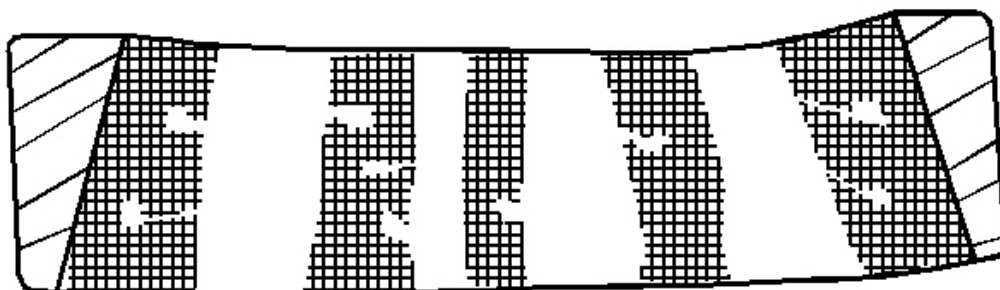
Inspecting Bearing Rollers & Races For Heat Discoloration
